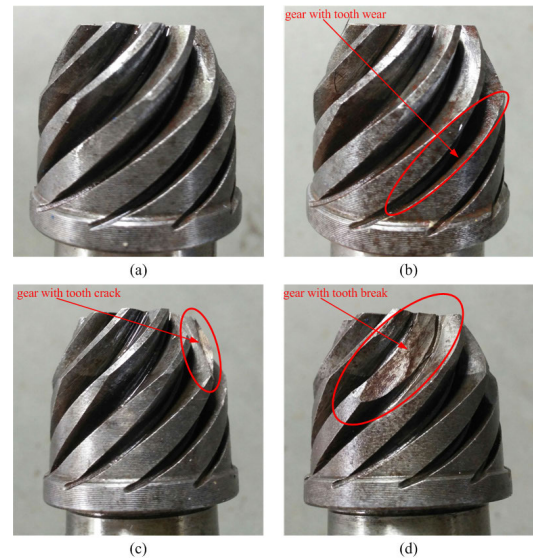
(a) Normal gear, (b) gear with tooth wear, (c) gear with tooth crack, and (d) gear with tooth break.
